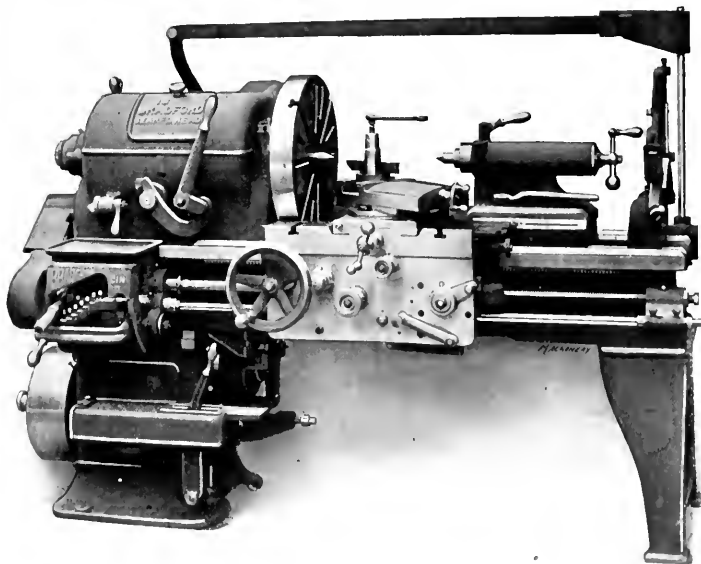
Bradford 18-inch Lathe with Single Pulley Drive through Geared Head
